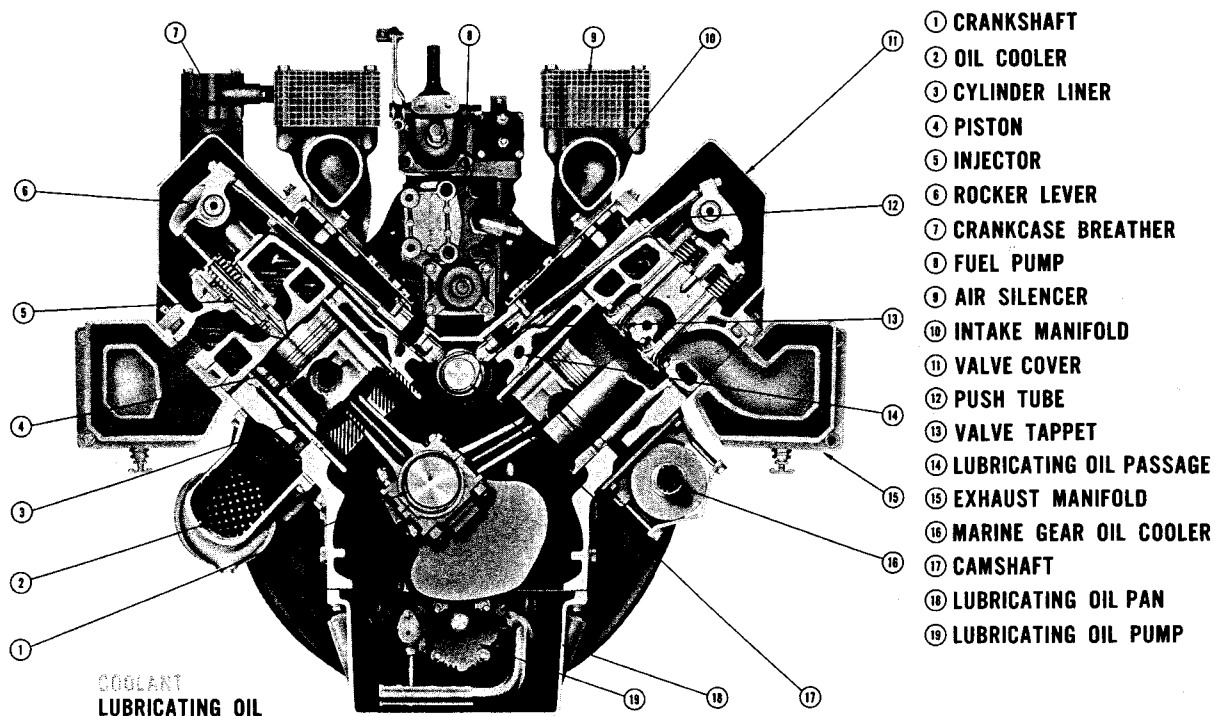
, (V11805). Lubricating oil and coolant flow — V-504 engine
